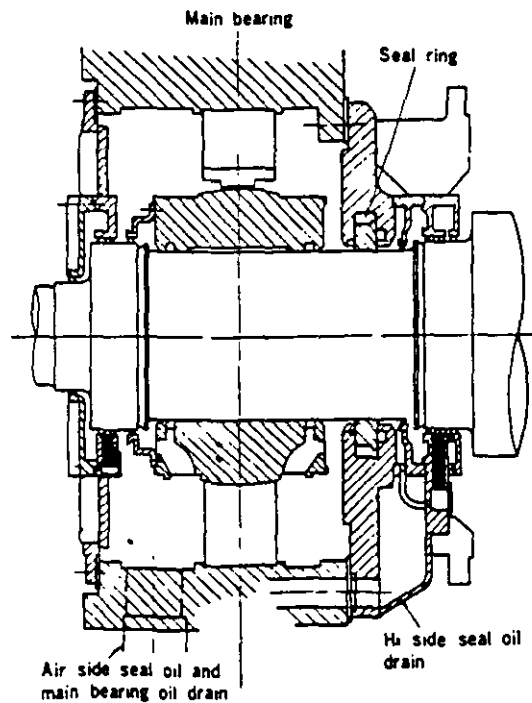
Gland seal assembly and associated apparatus—inner cooled
